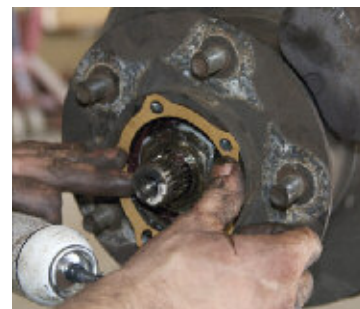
The drive member hub gasket sitting on the hub face. Install drive flange with bolts and spring washers.
